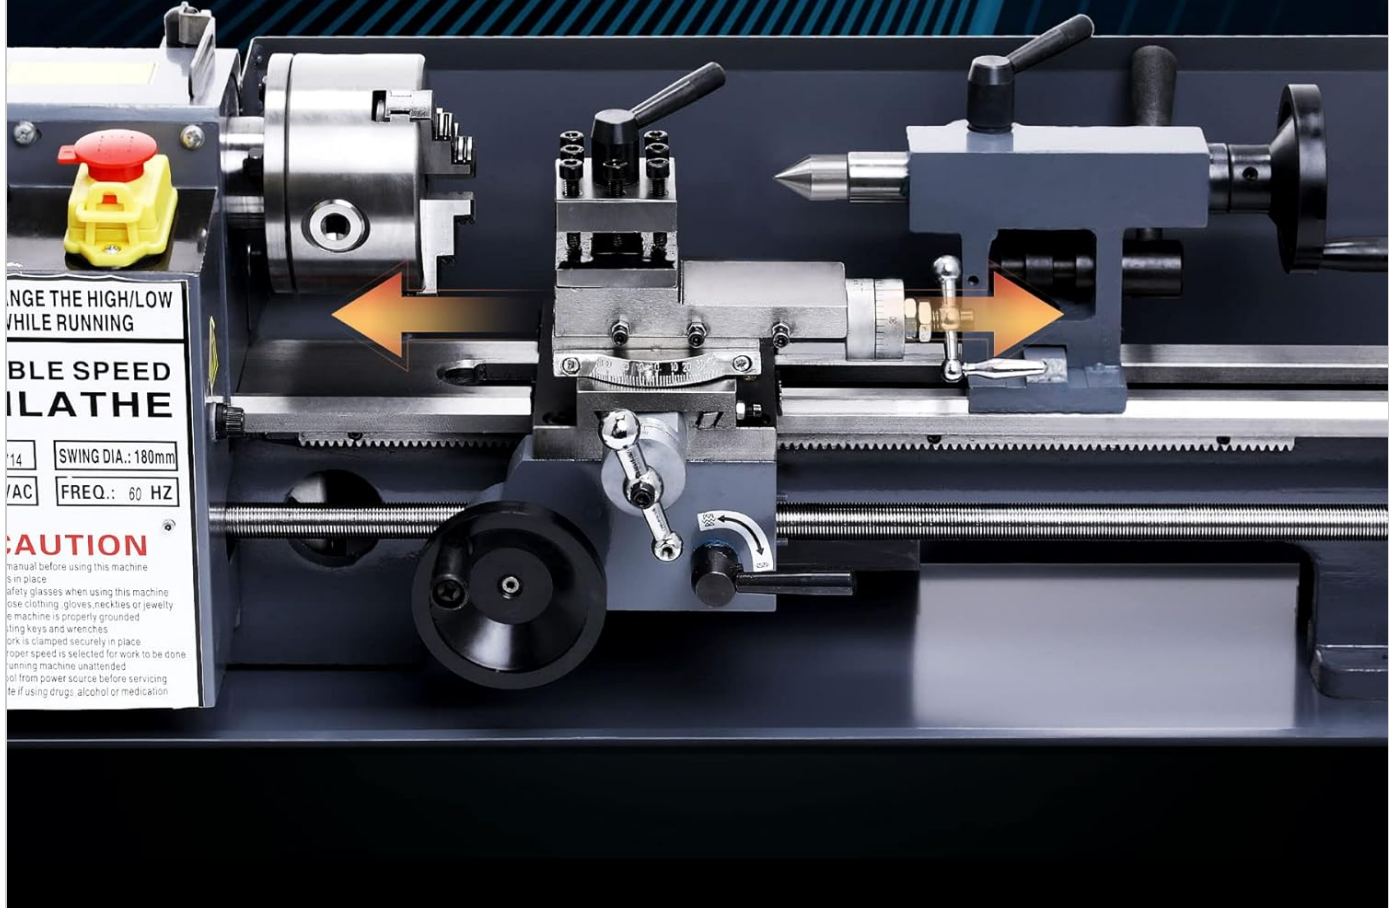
Illustration of the expansive work space, highlighting the 7-inch swing over bed and 14-inch distance between centers, indicating the maximum workpiece dimensions.
